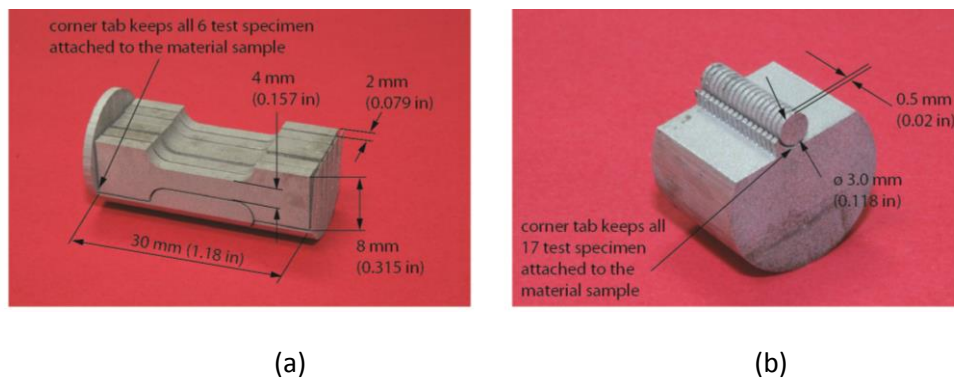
Test samples to be machined from an OPAL control rod (16.2 mm diameter). Tensile test specimen (a) machined in a single setup using the vertical and horizontal WEDM of the VHMC01. Six samples can be machined together from a rod section of 32 mm (1.26 in) length. TEM (transmission electron microscopy) samples (b) are machined as disks with 3 mm (0.118 in) diameter and 0.5 mm (0.02 in) thickness. 17 disks are machined together from a 12 mm (0.47 in) section in a single setup using the vertical and horizontal WEDM. Both sample types are held by small tabs that can be snapped off later using the manipulator.
